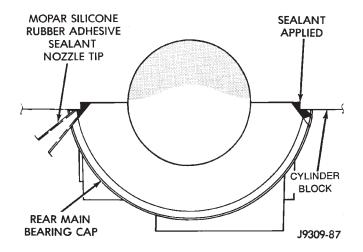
Apply Sealant to Bearing Cap to Block Joint
